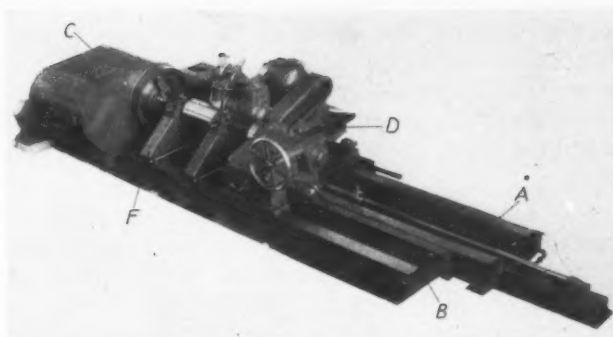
Large dimensions of frame would require extremely large foundry equipment
